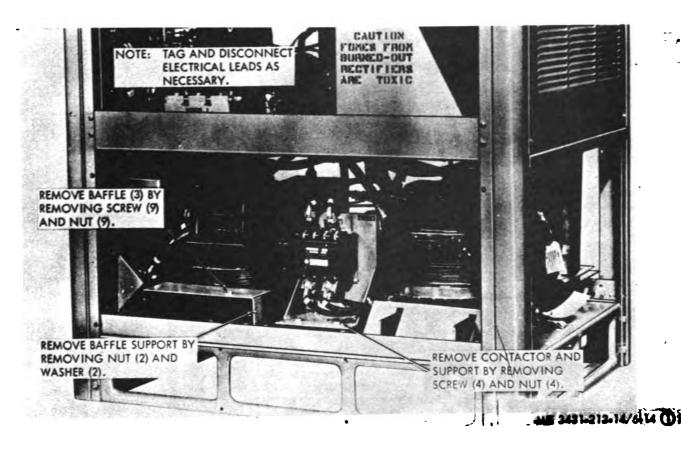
Stabilizing reactor assembly, removal and installation.
